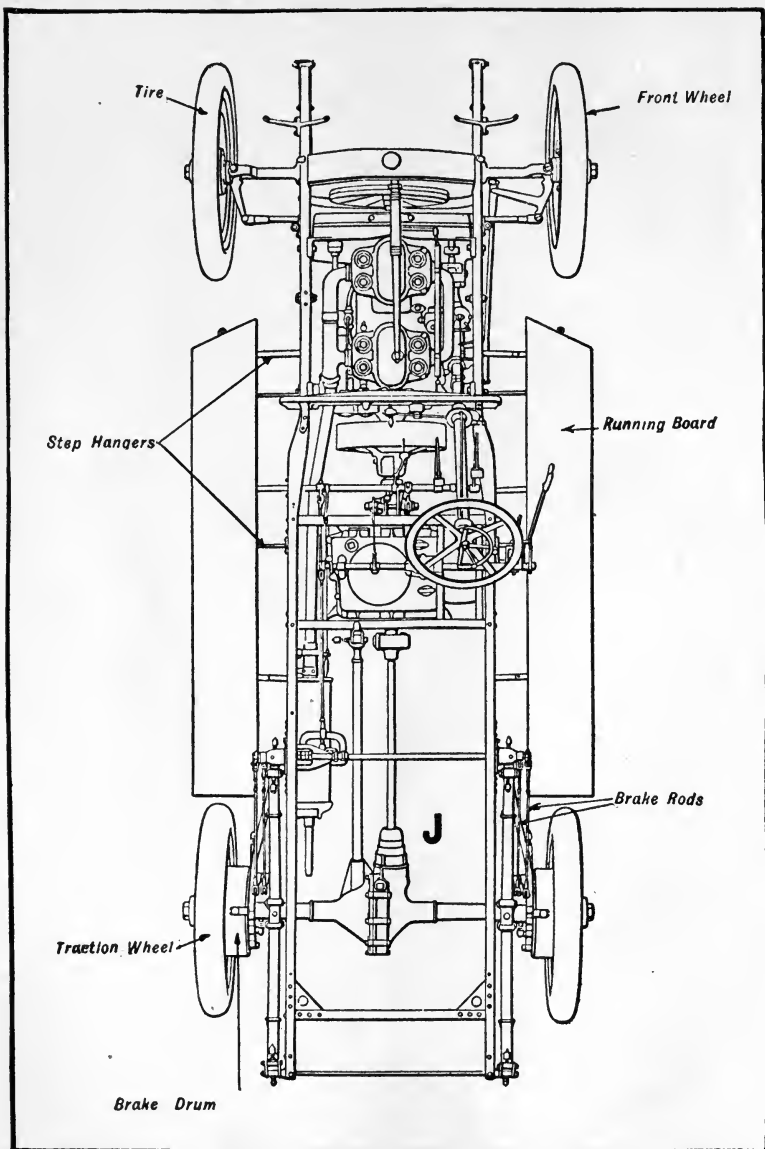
The Finished Chassis as it Appears After the Front Wheels, Tires, Traction Wheels, Brake Drums, Running Boards and Finishing Touches Have Been Made.
